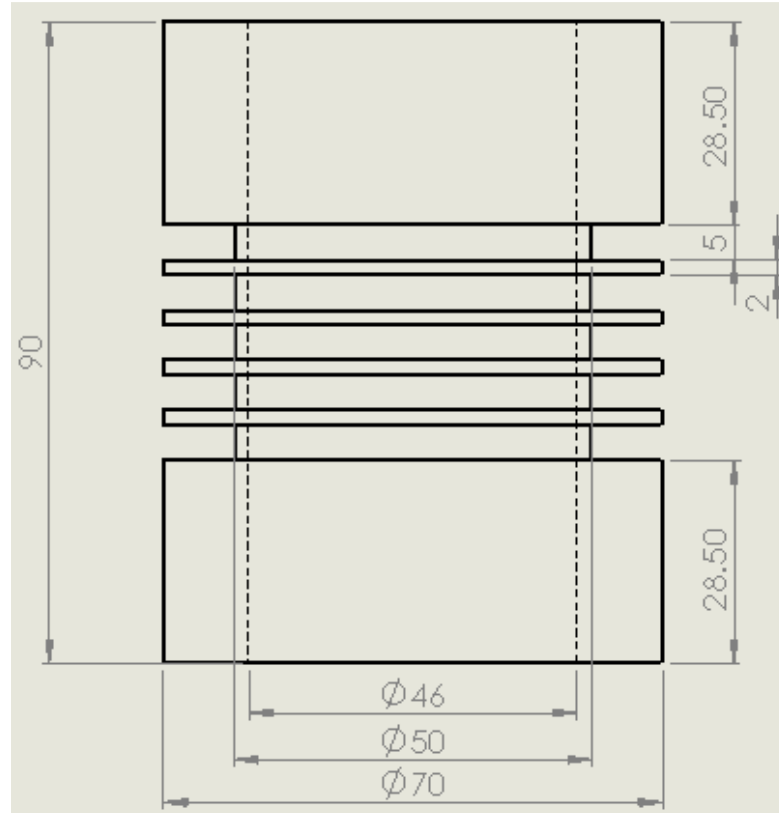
Dimensions of the coil holder (dimensions in mm)
